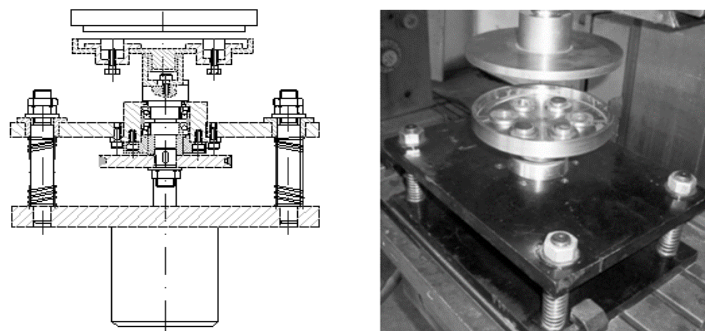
Schematic and a photograph of the eccentric lapping equipment
